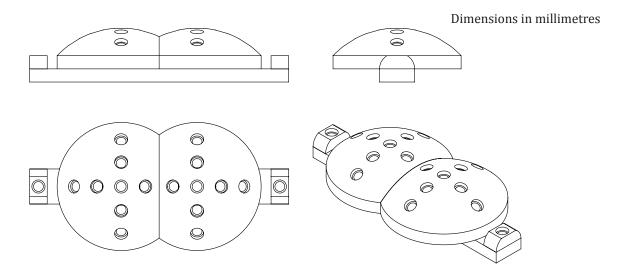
Indenter assembly for 220 mm and 255 mm indenters
